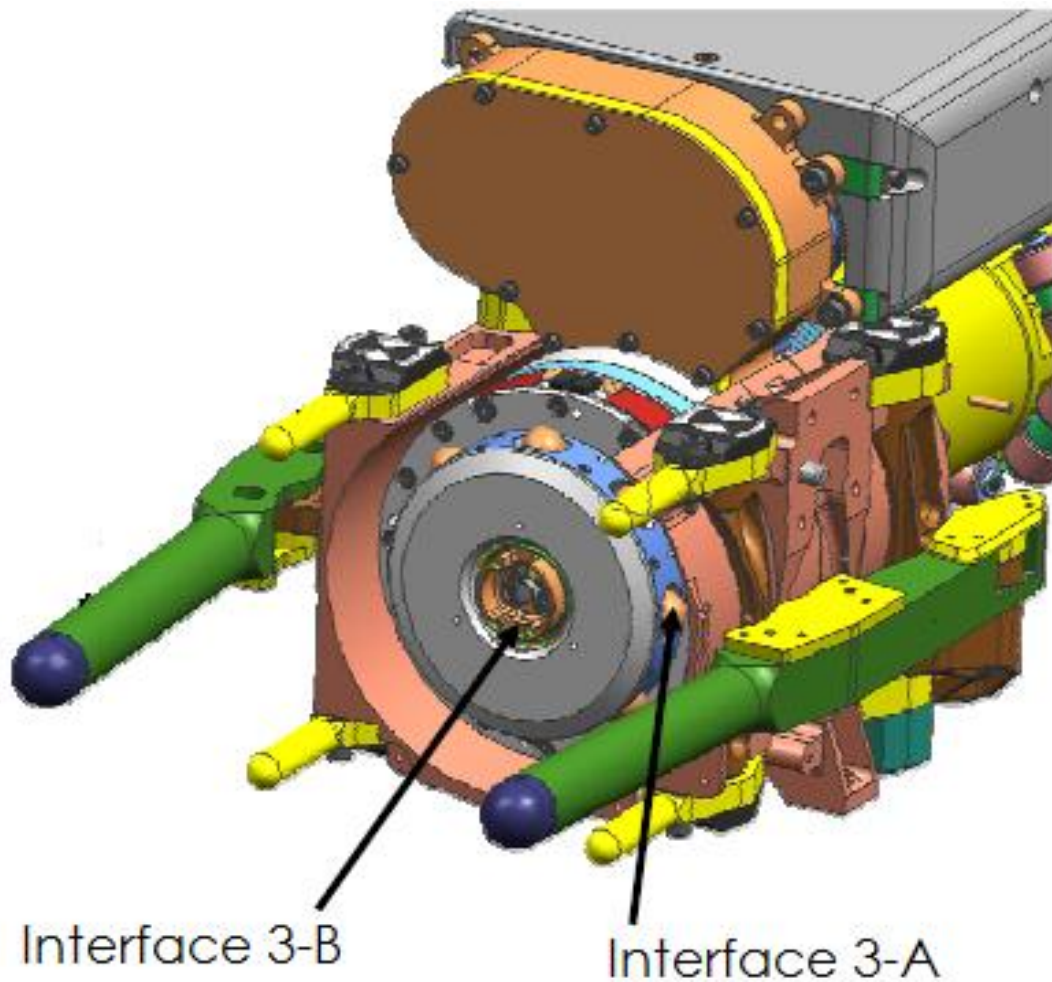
Interface, Robotic Arm to Drill Bit Assembly
